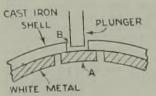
Test for Measuring Adhesion of White Metal Bearing Alloy to Cast-Iron Shell.
